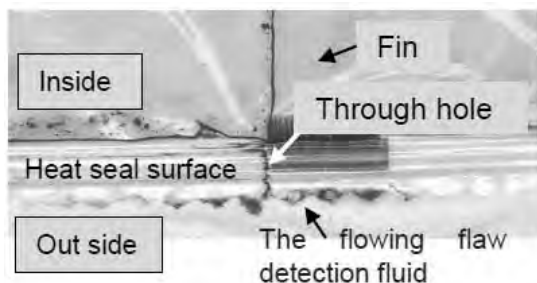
Measurement example of through hole in step seal part of center seal of commercially available packaging products by "flaw detection liquid".
